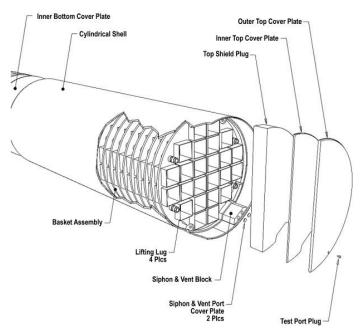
Exploded View of a Typical UNF Dry Storage Canister
